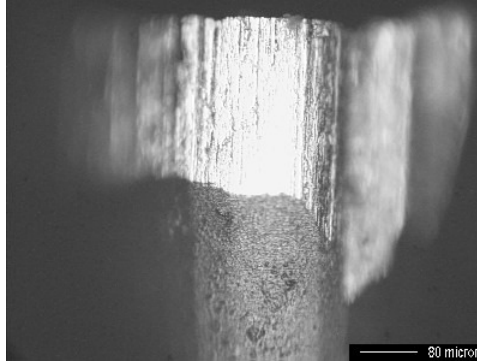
Non-uniform tool flank wear when the average tool flank wear length is about  $250\mu m$  (Cutting velocity = 137.25 m/min, feed = 0.0762 mm/rev, depth of cut = 0.508 mm)
